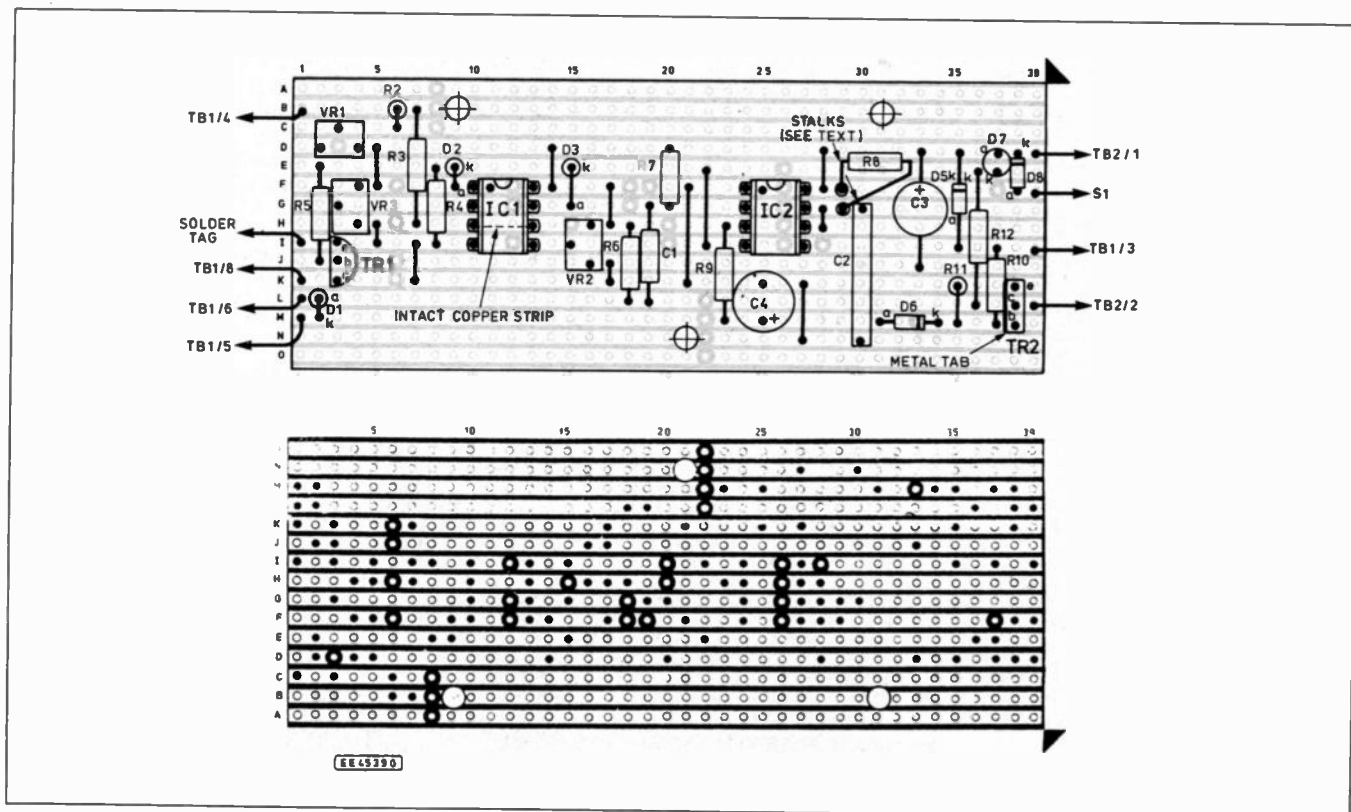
Stripboard topside component layout and detail of breaks required in the underside copper tracks.
